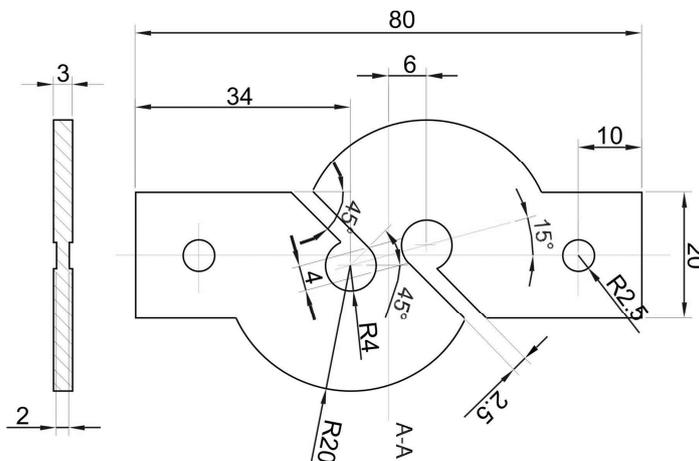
Geometry and dimensions (in mm) of SHEAR specimens.
